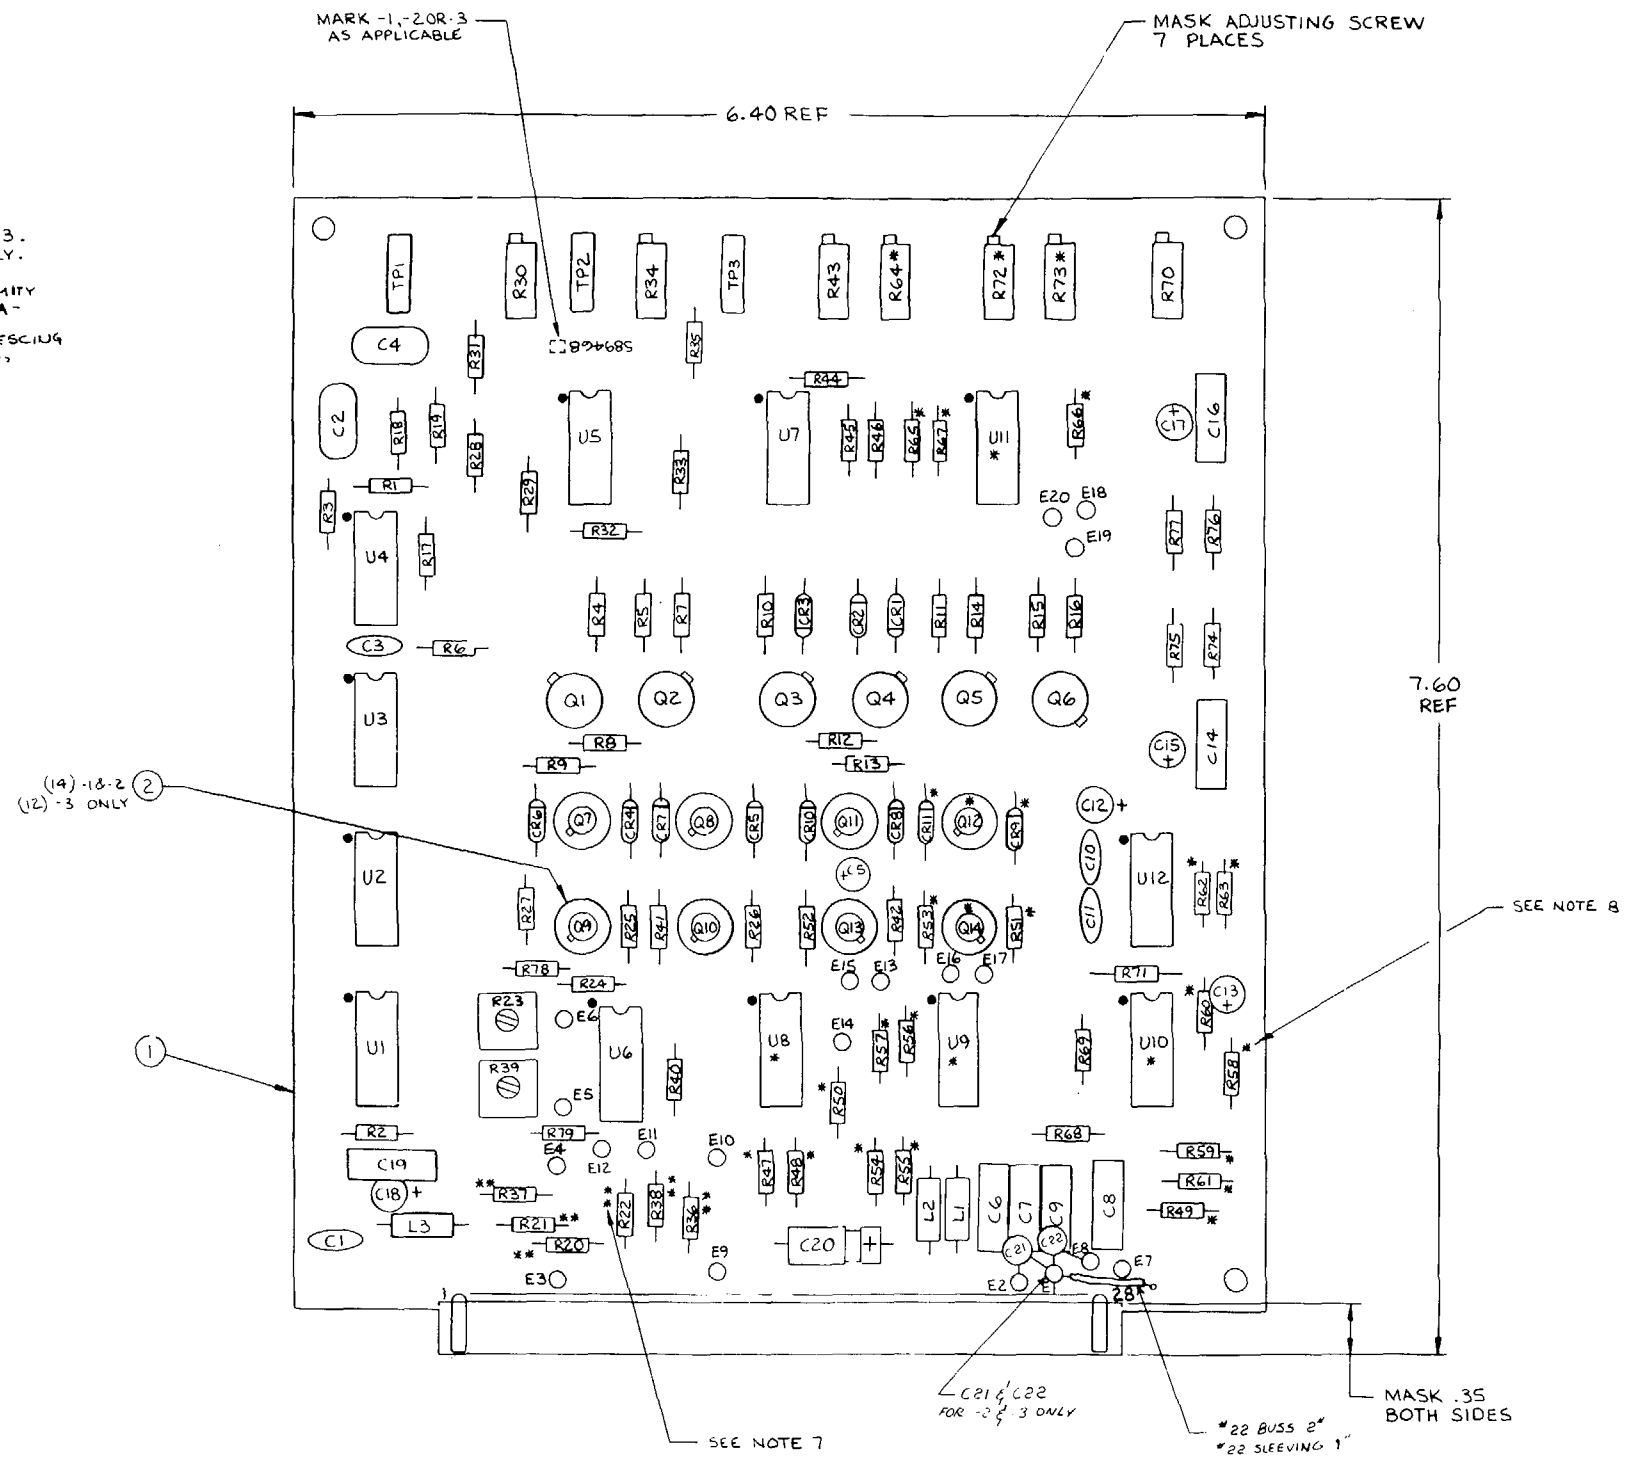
TM/EBL Circuit Card Assembly Drawing
